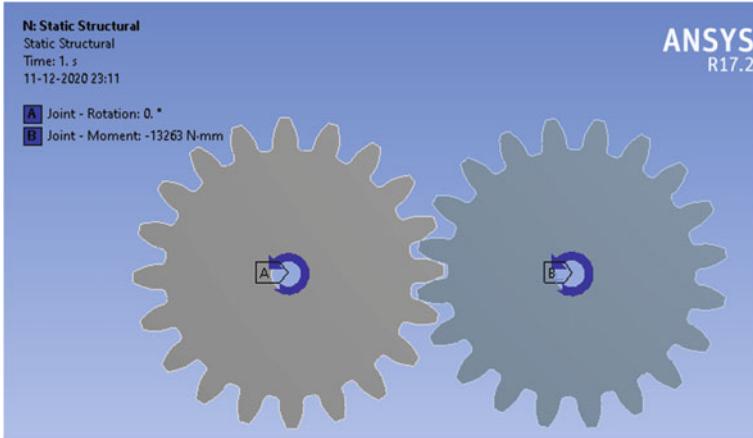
Rotation of gear fixed and pinion torque of 13,262.91192 N-mm
